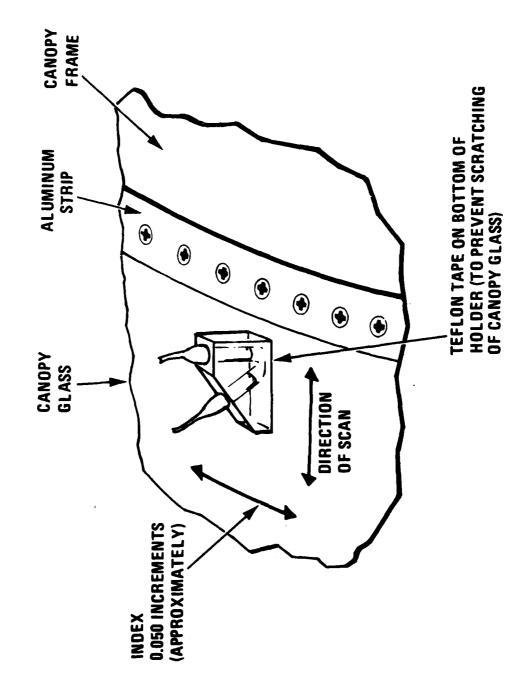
TYPICAL PLACEMENT OF TRANSDUCER HOLDER ON AREA OF INSPECTION — DELTA TECHNIQUE
